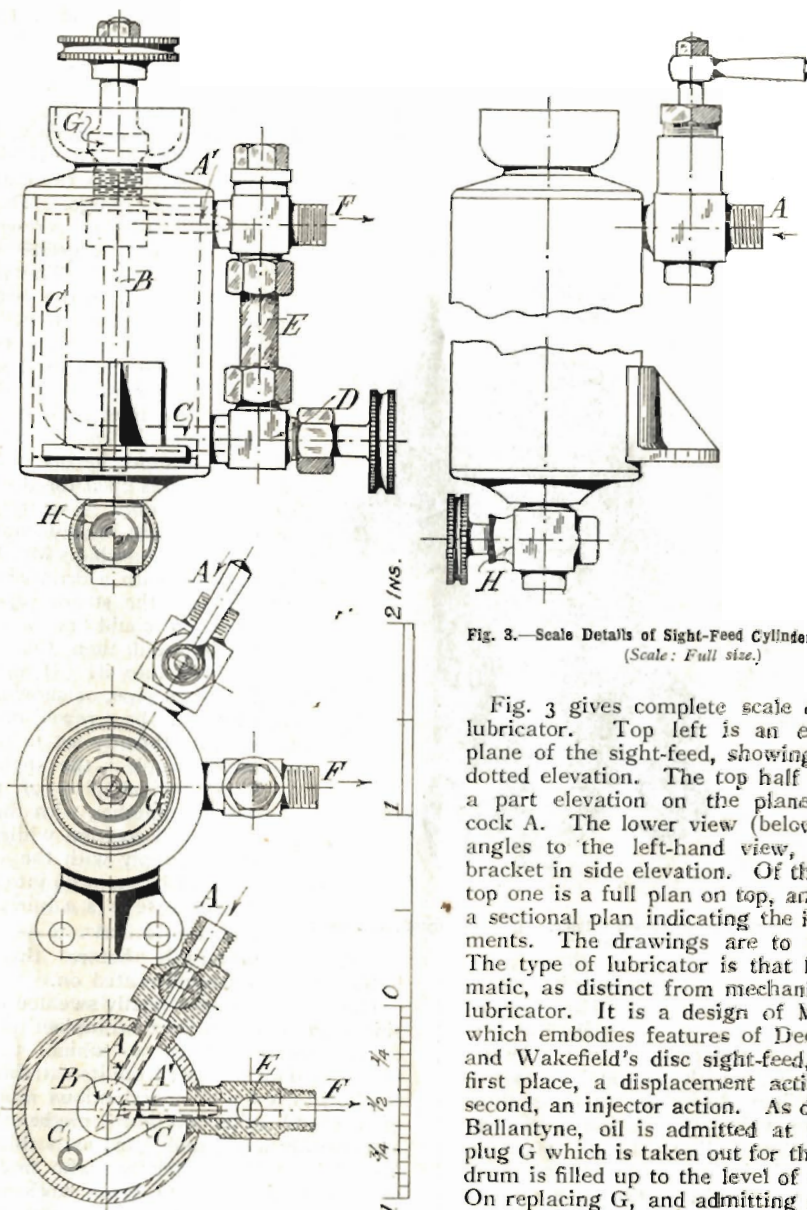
Scale Details of Sight-Feed Cylinder Lubricator.
